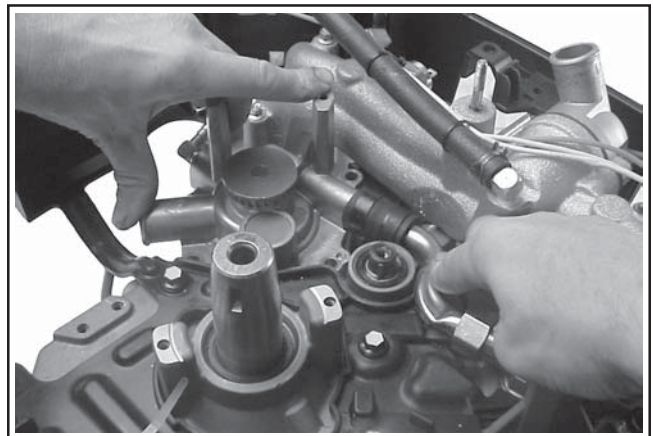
Inserting Tube into Ferrule and Hex. Cap.
